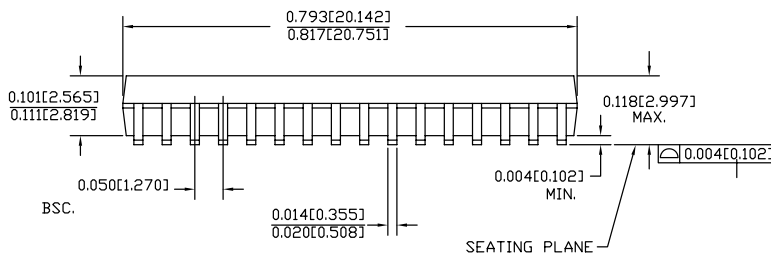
32-pin Molded SOIC (450 Mils) Package Outline, 51-85081
